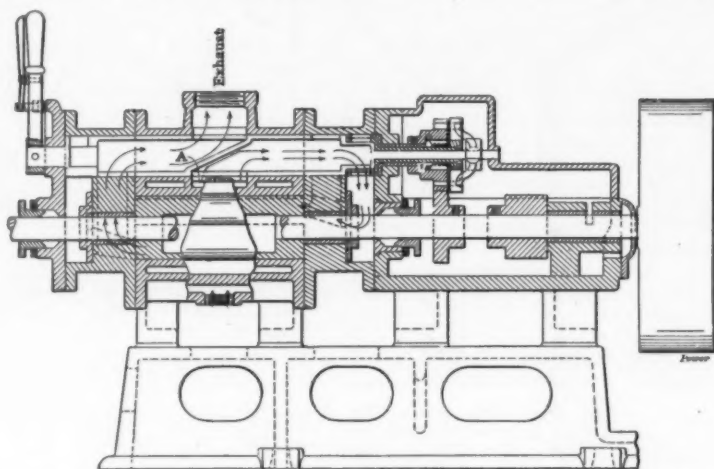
SECTIONAL VIEW OF MOTSINGER ROTARY ENGINE.
